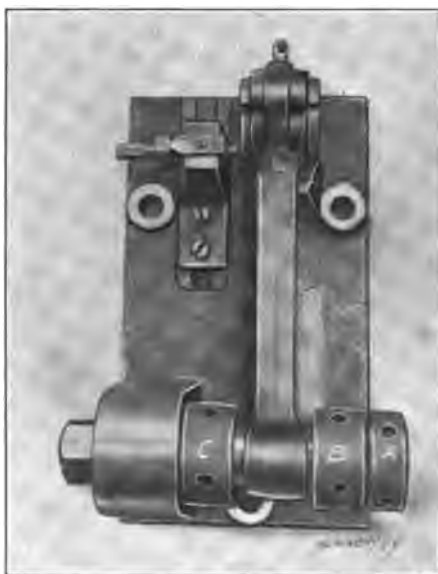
Fixture for Testing the Relative Lateral Positions of Connecting-rod Bearings
